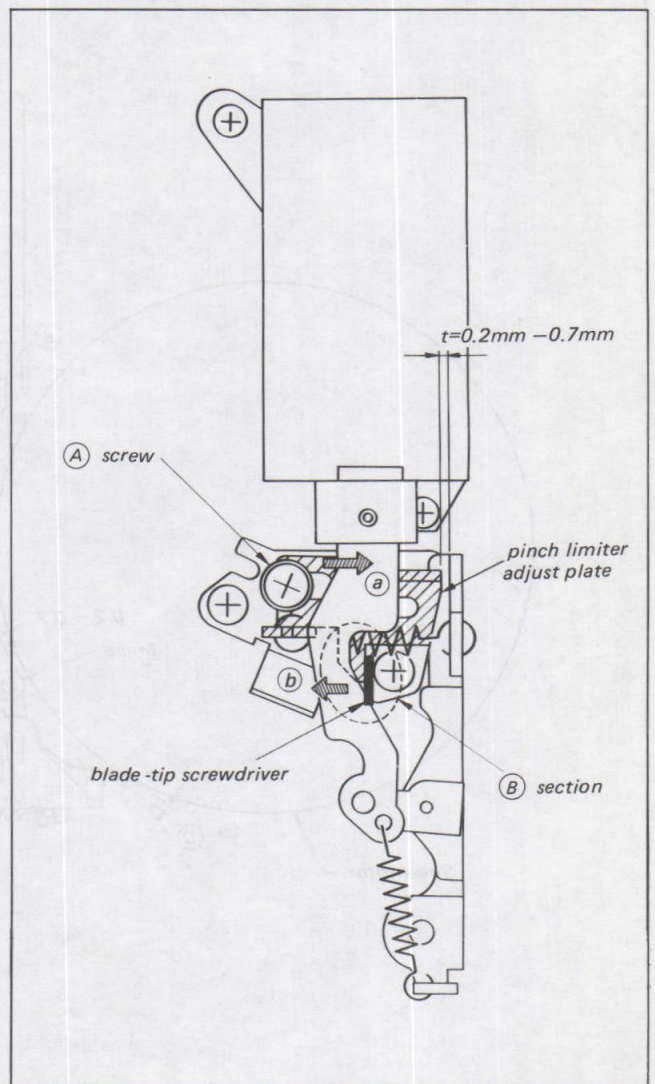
Adjusting clearance of pinch crimp limiter
